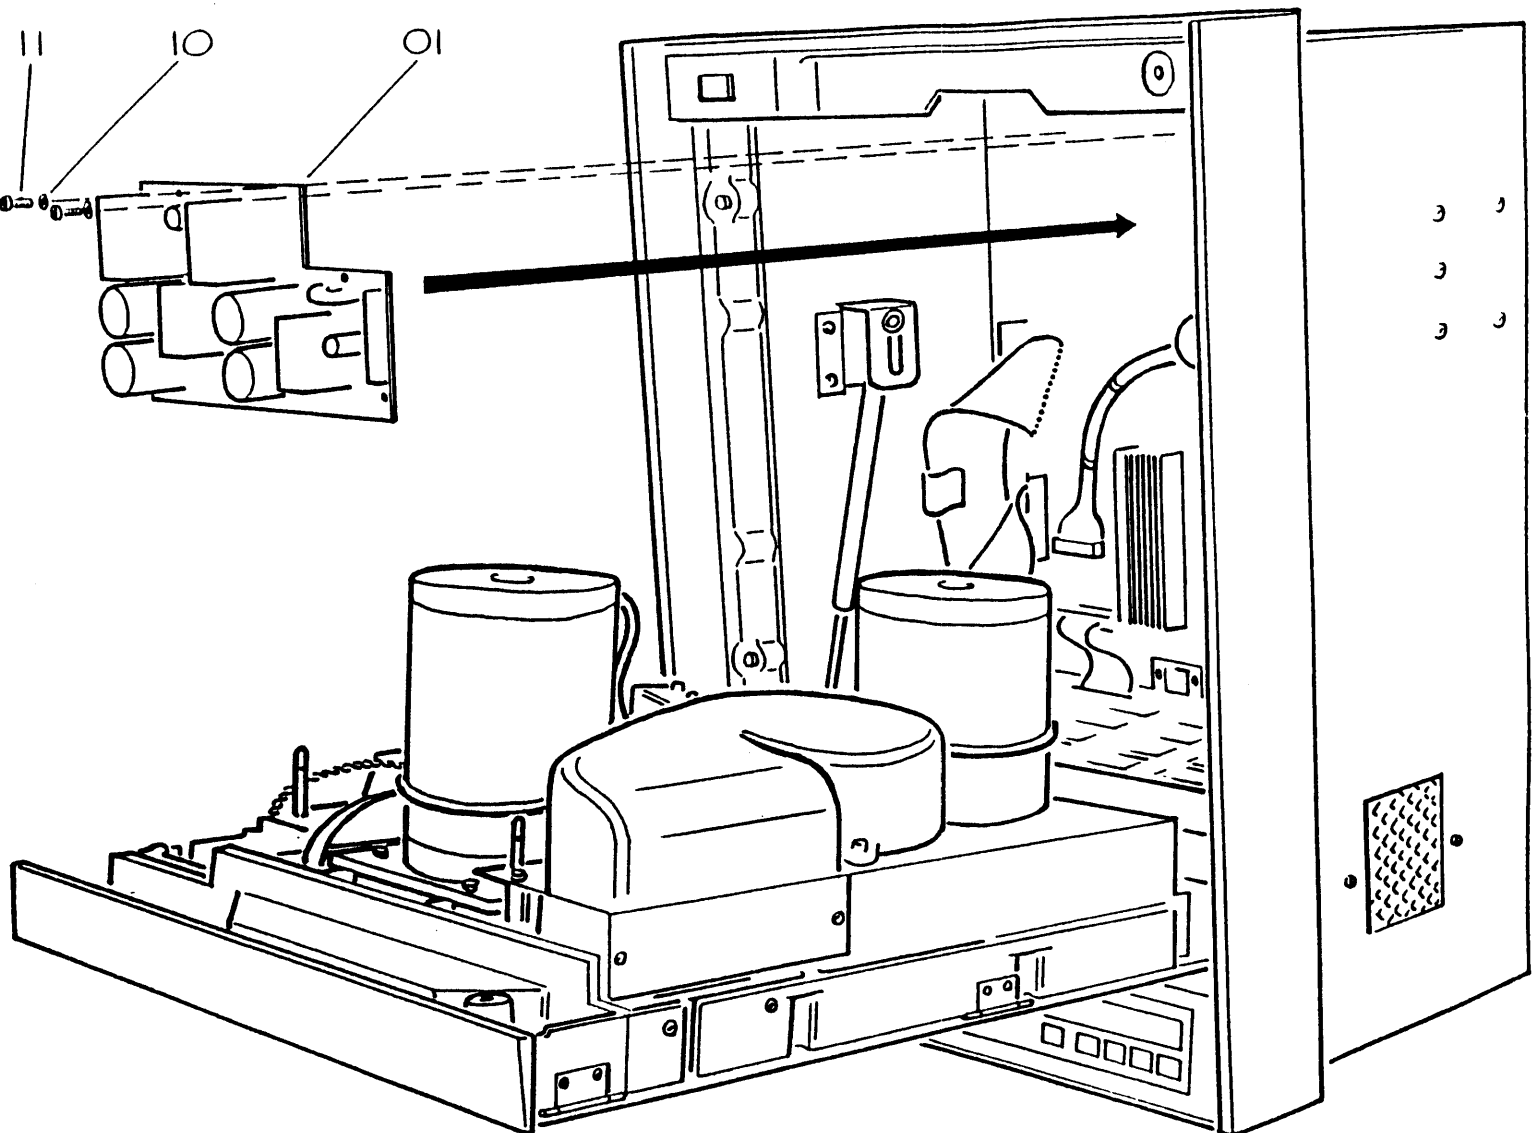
AC POWER SUPPLY BOARD
